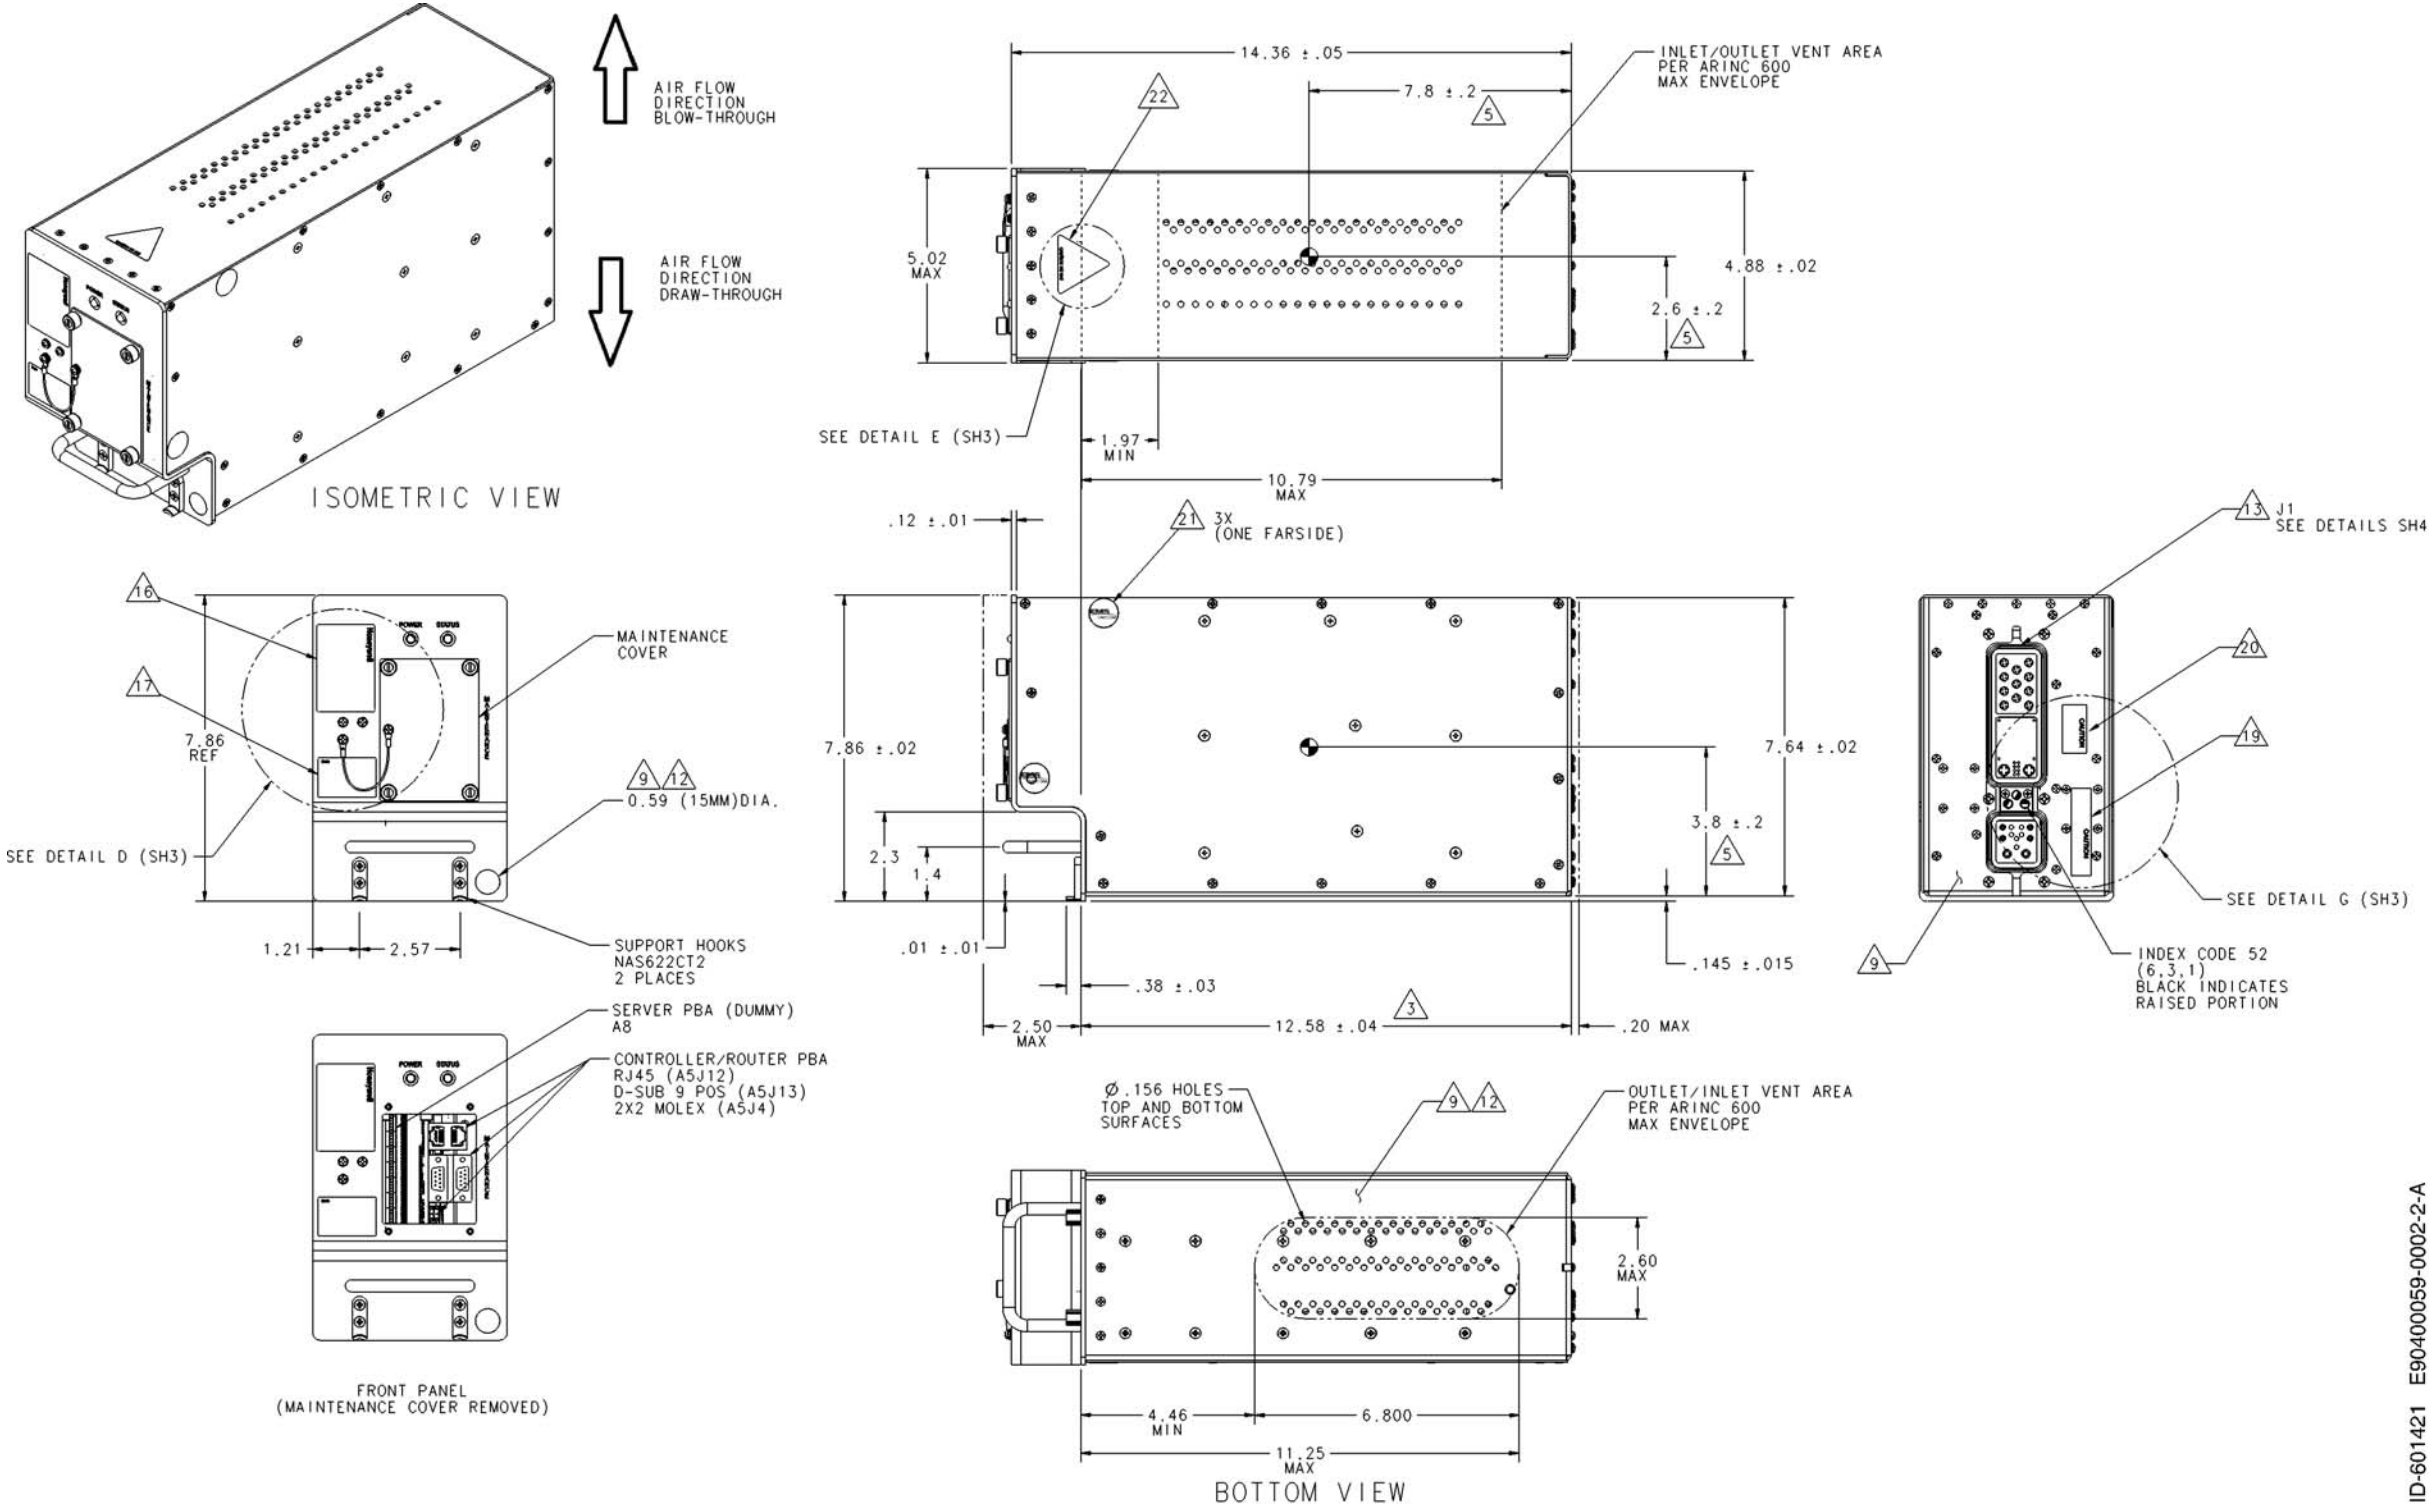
(Sheet 2 of 4) Modman Outline and Installation Drawing Variant 2 (90400059-0002, REV A)
